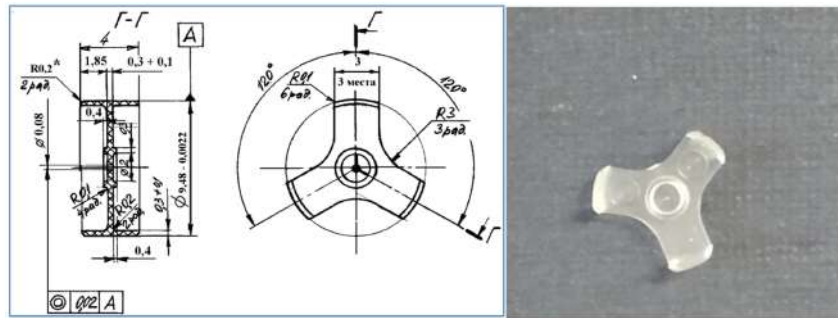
Technical drawing (left) and photo (right) of the internal backing of the signal spacer wire.
